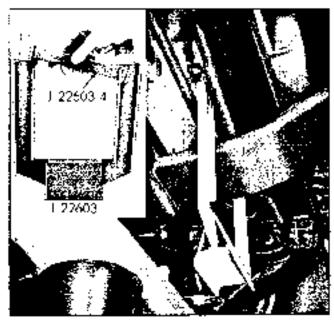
Figure Lifting Tool Installed—Postnet and Tempest
